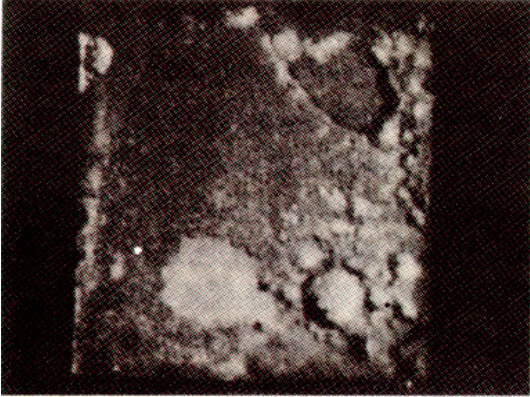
Fracture surface of torch presoldered Bond-on 4 specimen. (×20)
